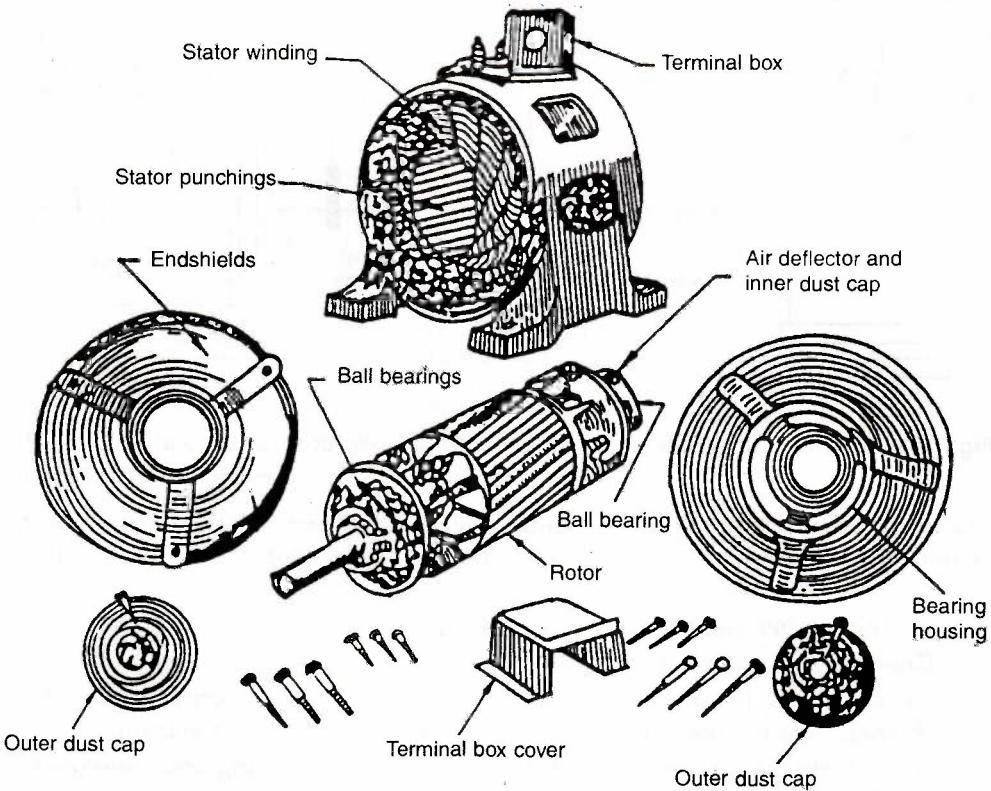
Component parts of a small squirrel-cage induction motor.
